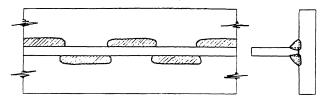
Staggered Intermittent Fillet Welds
